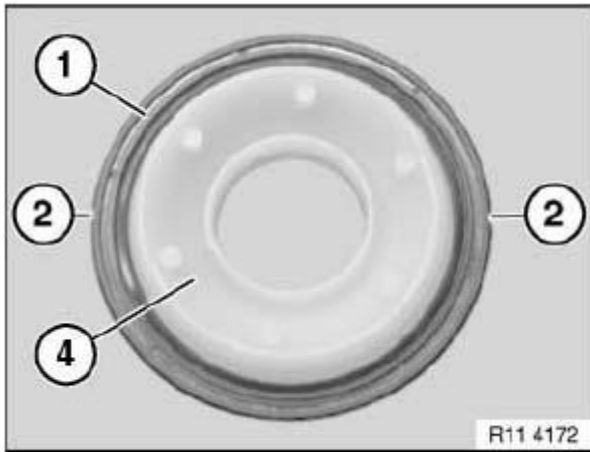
Identifying Radial Shaft Seal, Groove And Sleeve
